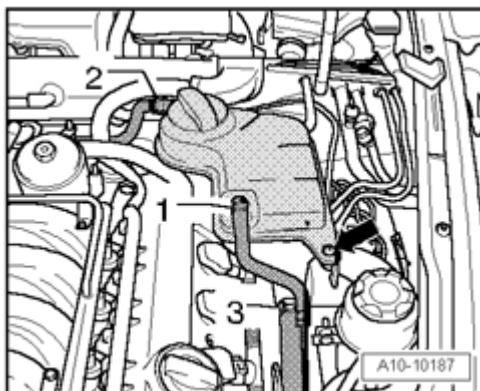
Removing Coolant Hoses & Coolant Expansion Tank
